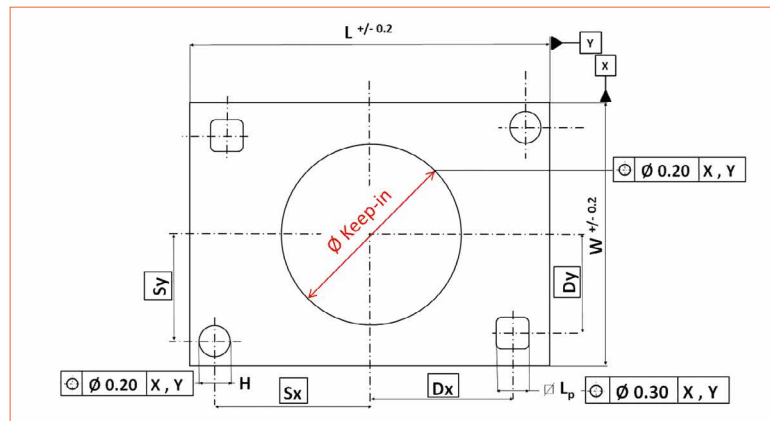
COB module specification including key dimensions defined according to the geometric dimensioning and tolerancing (GD&T) method. Values of the different dimensions for each COB category are shown in table 1
